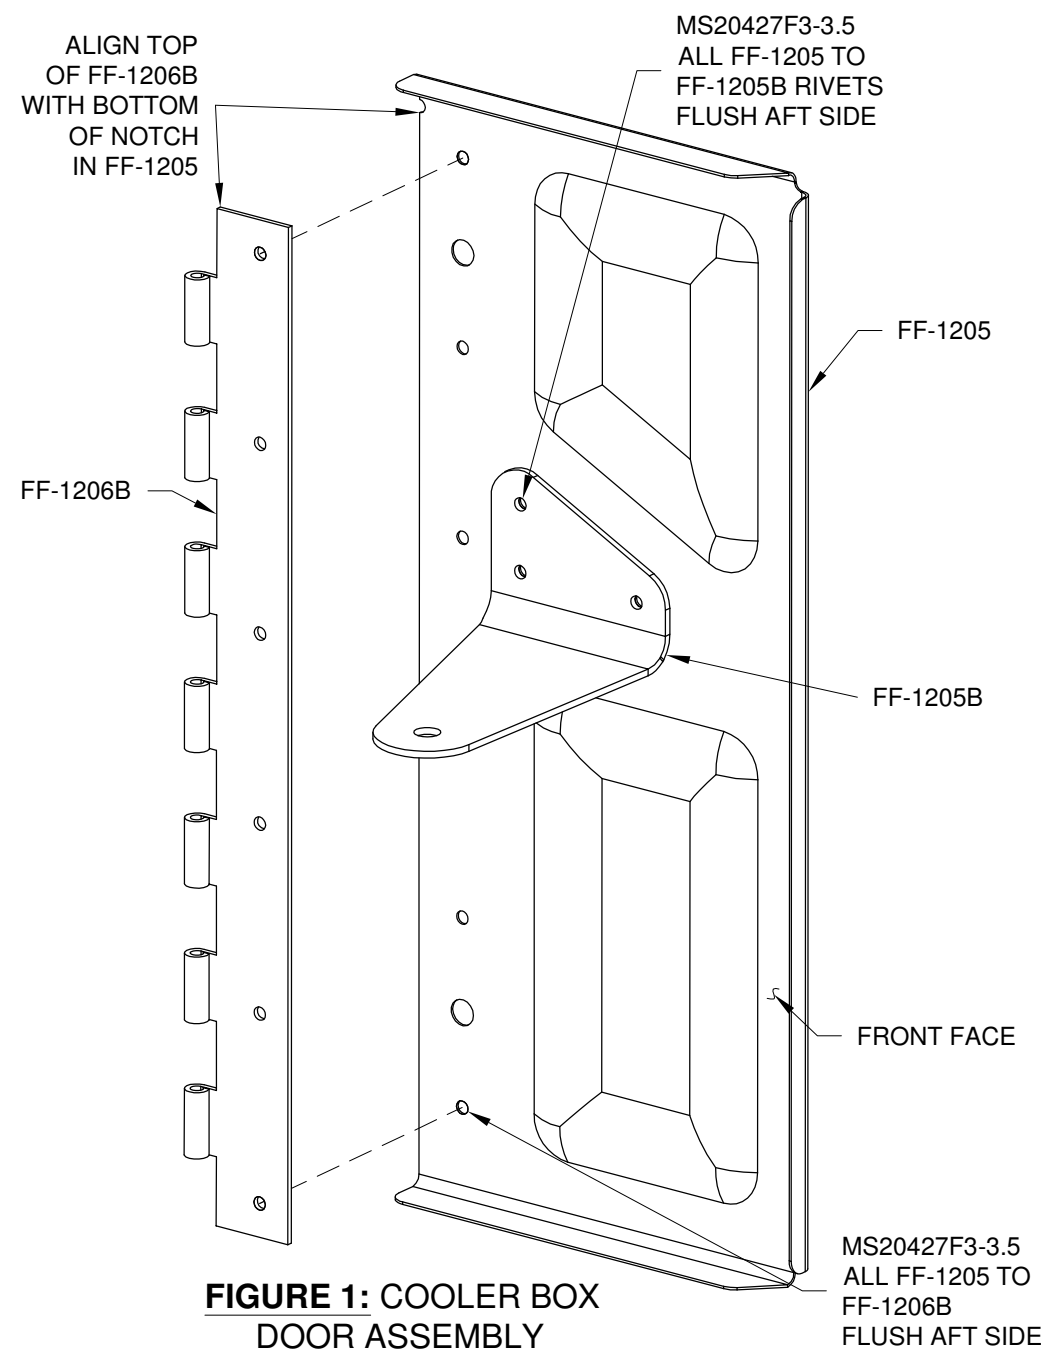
COOLER BOX DOOR ASSEMBLY
